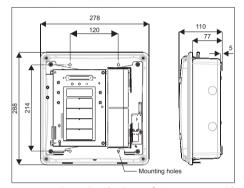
Dimensional view of Gasmaster with mounting holes shown
